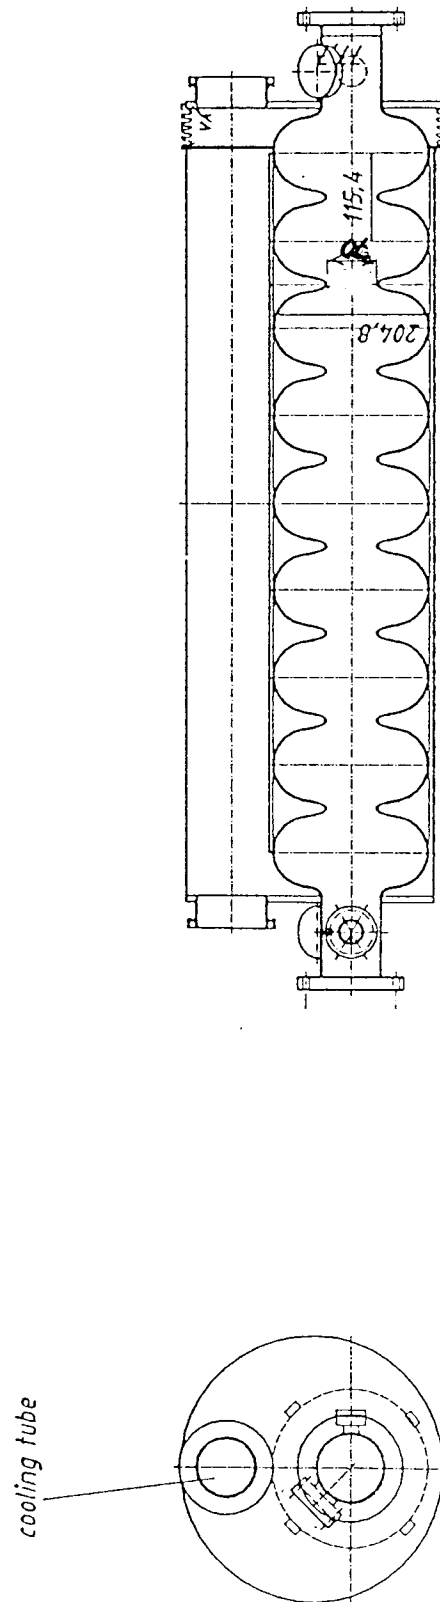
9-cell cavity welded into its stainless steel He-vessel.
